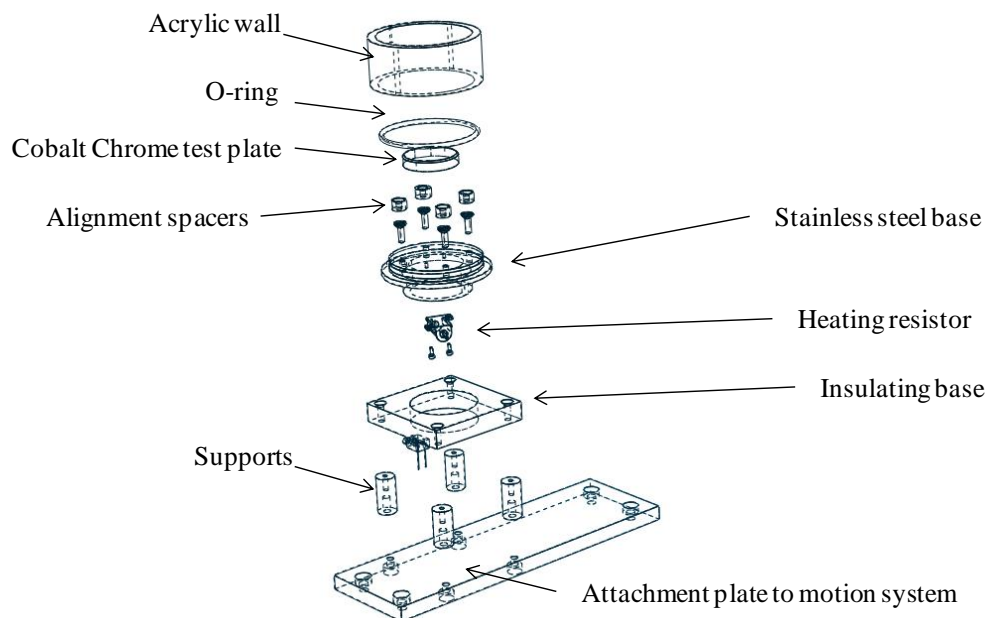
Exploded view of the modular chamber assembly. Five different materials were specified to optimise the design functionality; acrylic, nitrile rubber, 304 stainless, nylon and aluminium.
